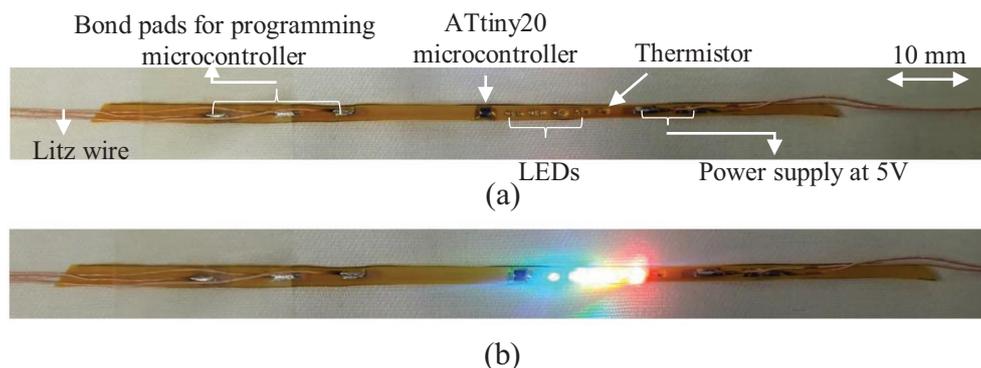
a) Mounted components on a filament using soldering and b) an operational digitally controlled LED filament switched on at 5 V.
